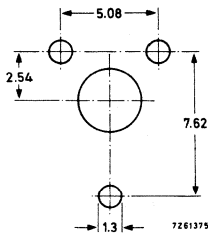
Type with top and bottom adjustment, rotor tags over 180°
